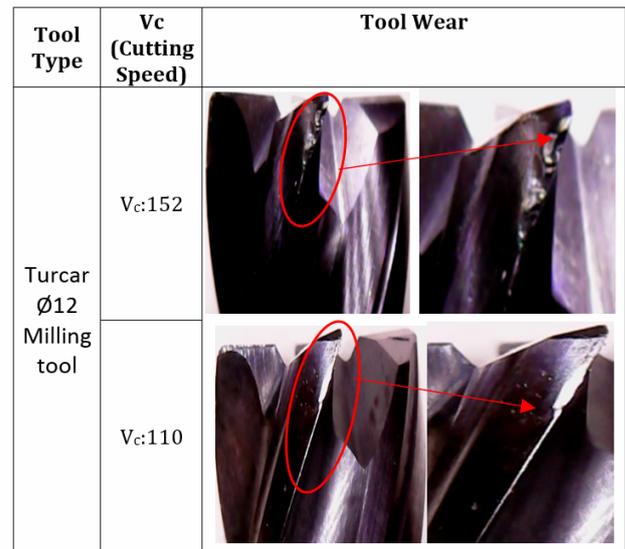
Tool wear for 45min. machining of $\varnothing 12$ Turcar
